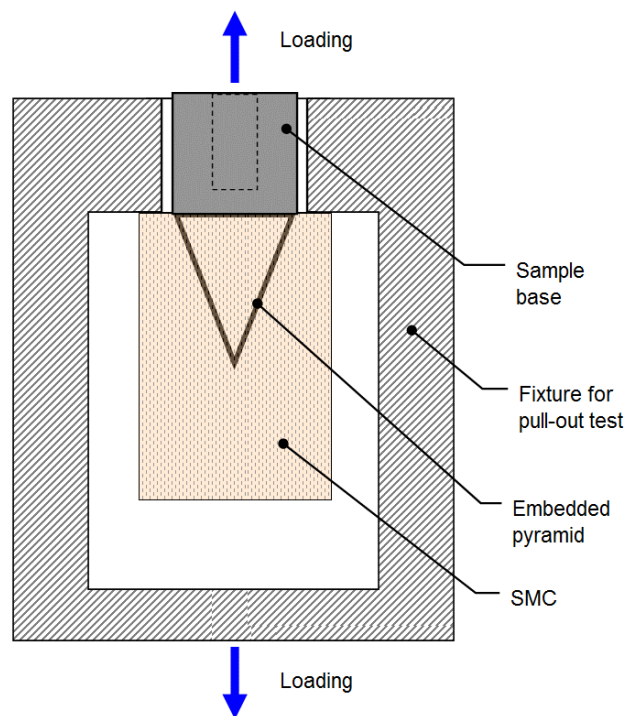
scheme of the testing fixture for pullout test and sample assembly
